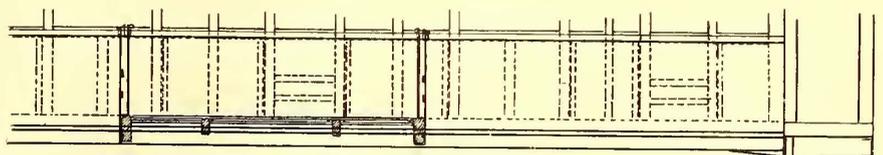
PLATE GIRDER CONSTRUCTION OF A PRUSSIAN VESTIBULED CAR
